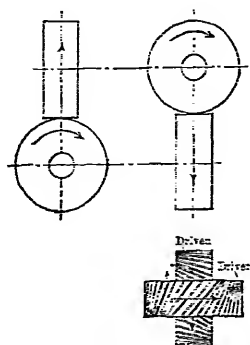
Right-hand spiral gears—clockwise rotation.
